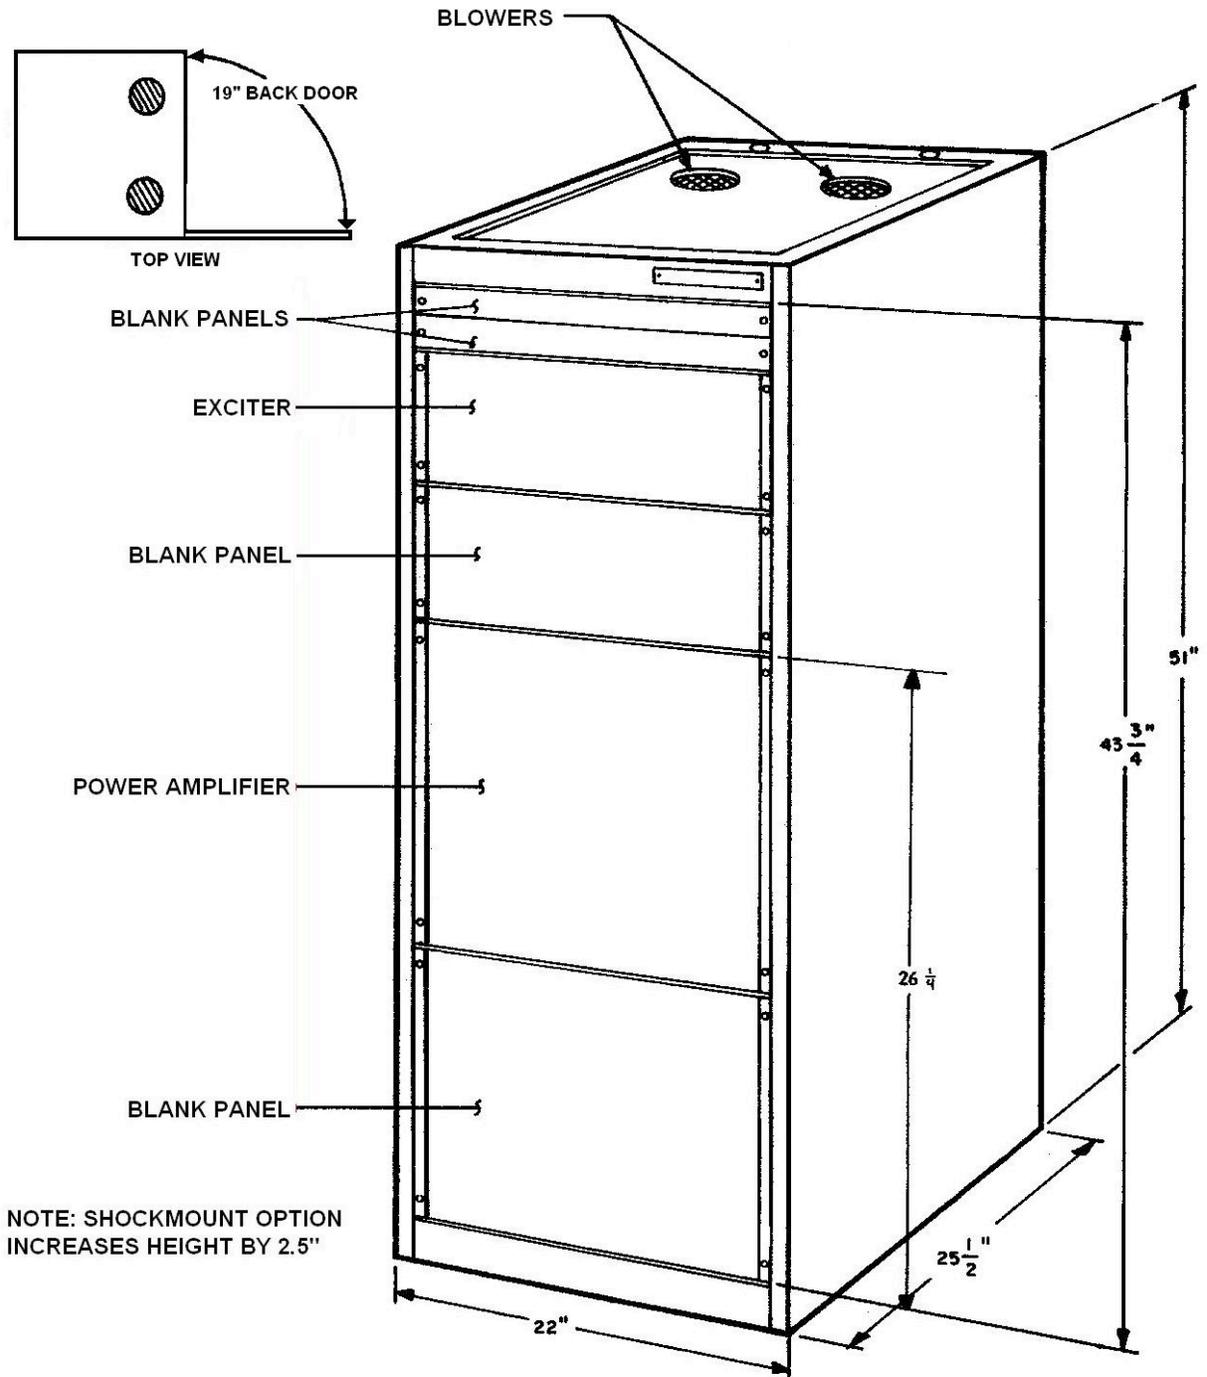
Shockmount Equipment Rack with Outline Dimensions and Details
